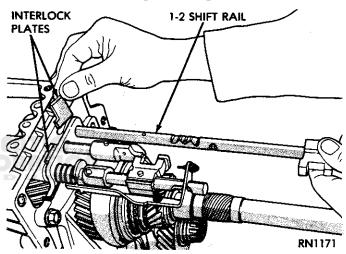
Removing/Installing 1-2 Shift Rail And Interlock Plates
